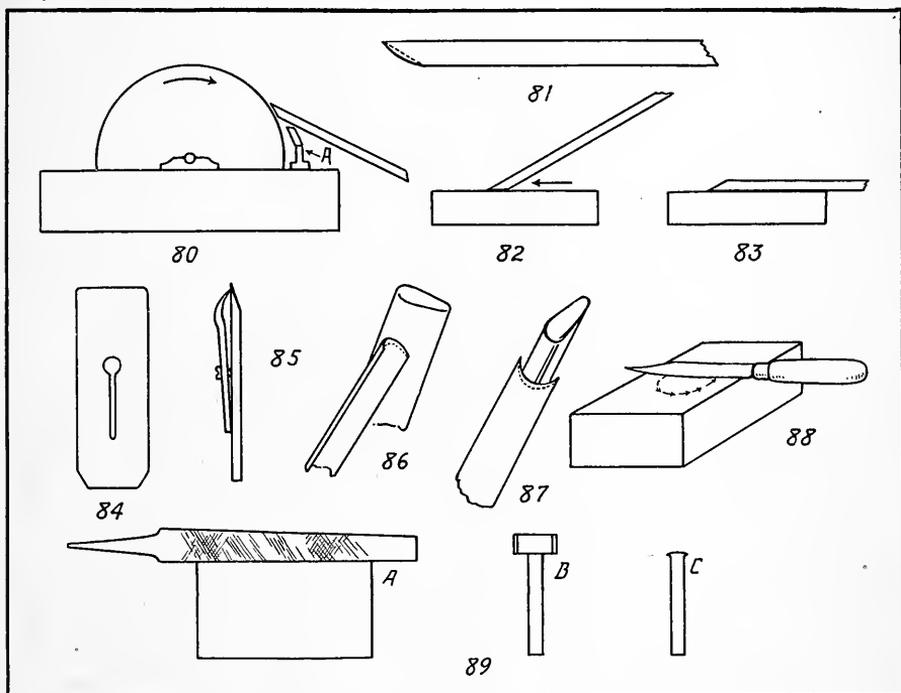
ADJUSTMENT OF TOOL TO GRINDSTONE. FIG. 81.—IMPROPER BEVEL. FIG. 82.—ADJUSTMENT OF TOOL TO OIL STONE. FIG. 83.—REMOVING WIRE EDGE. FIG. 84.—ROUNDED PLANE IRON EDGES. FIG. 85.—PLANE IRON AND CAP ATTACHED. FIG. 86.—SHARPENING OUTSIDE BEVELED GOUGE. FIG. 87.—SHARPENING INSIDE BEVELED GOUGE. FIG. 88.—SHARPENING KNIFE. FIG. 89.—SHARPENING CABINET SCRAPER.
